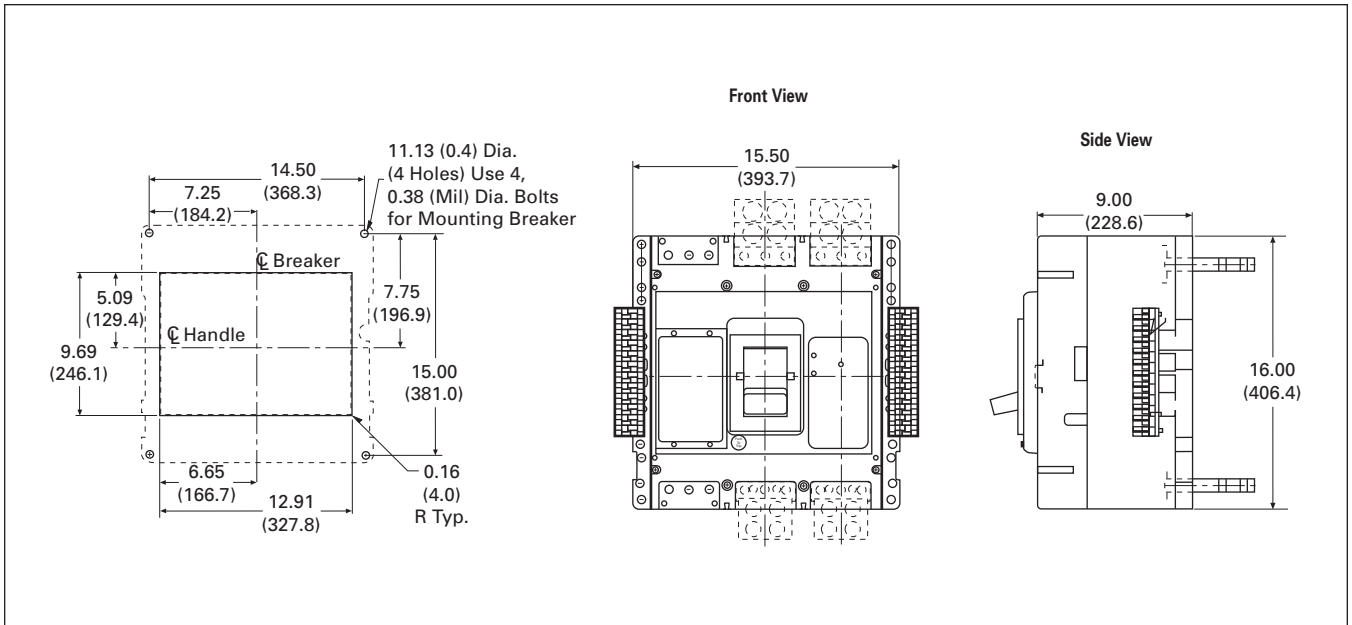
RD-Frame, 3-Pole, 1600 and 2000 Amperes — Dimensions in Inches (mm)
